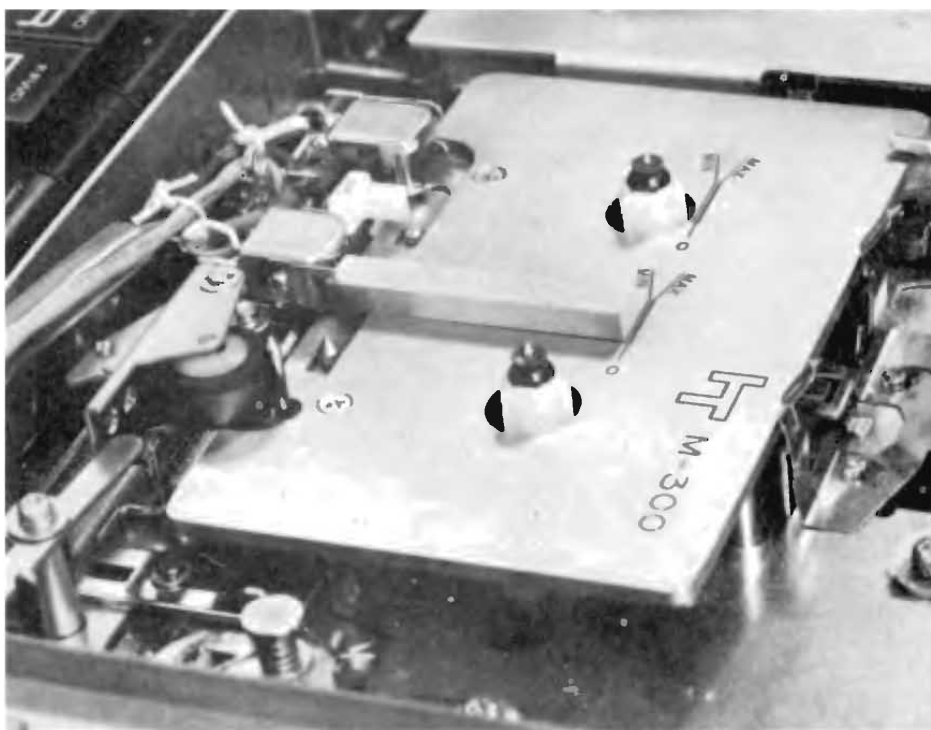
The metal gauge finger on the mechanical alignment fixture serves two purposes. It checks head guide alignment by sliding between the head guides when correctly aligned. Secondly, it checks head penetration, indicating proper penetration on the lines scribed on the surface of the plate.
